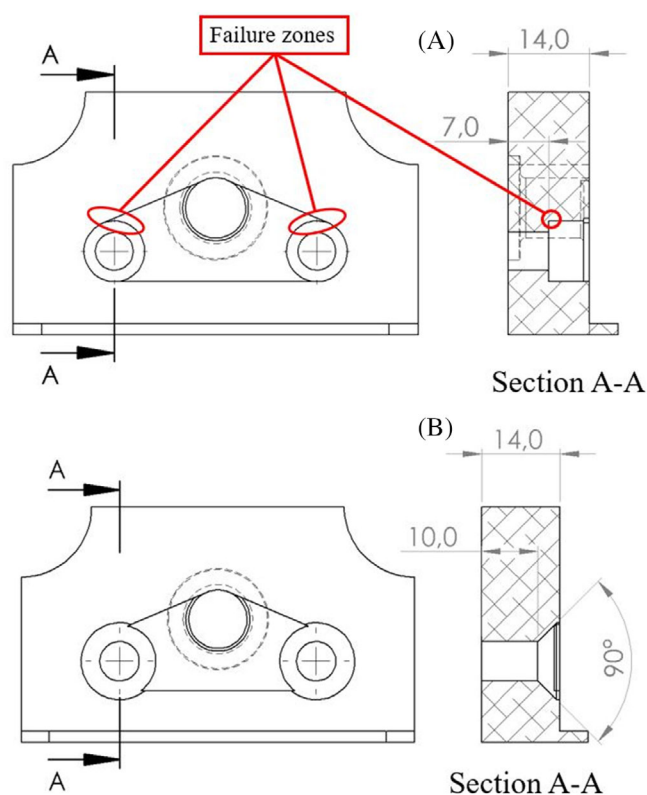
Section view with shape of screw heads: (A) counterbore screw section of the component currently in use; (B) section of the alternative countersunk screw
